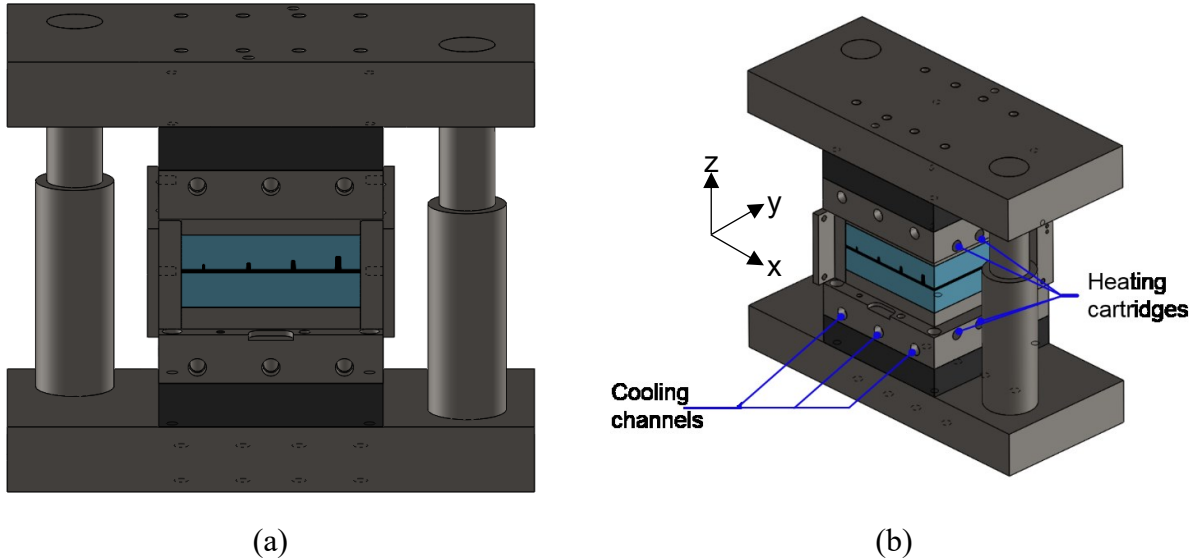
Rib moulding setup showing (a) front view and (b) isometric view.
